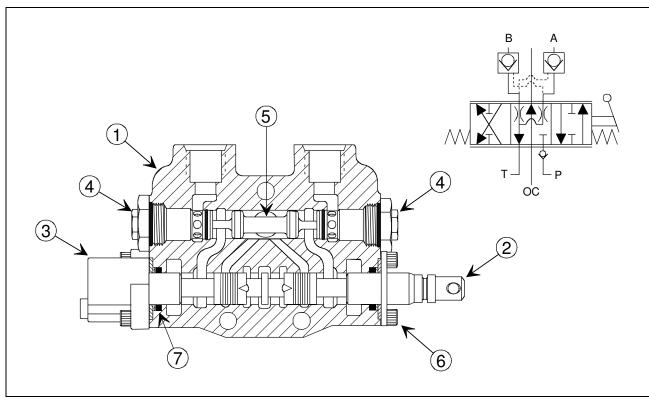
4-Way, 3-Position 'V20LO' Lockout Work Section
